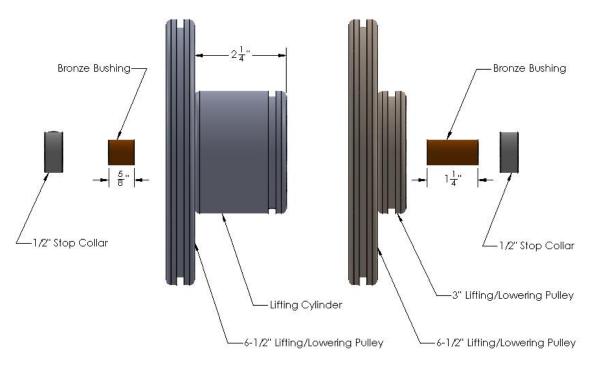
P - Cam-cylinders Configuration for PDL (right side view)
